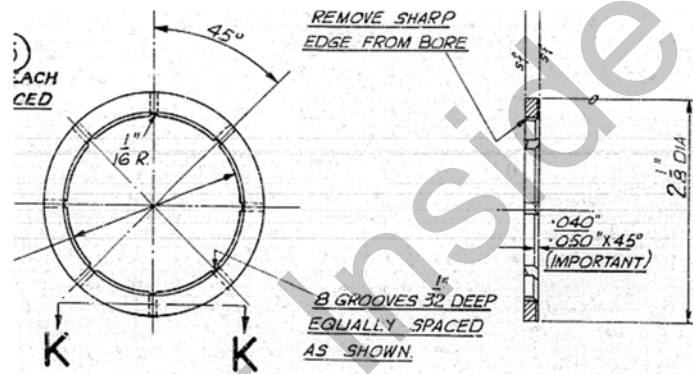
Primary gear thrust washer 22A321.
